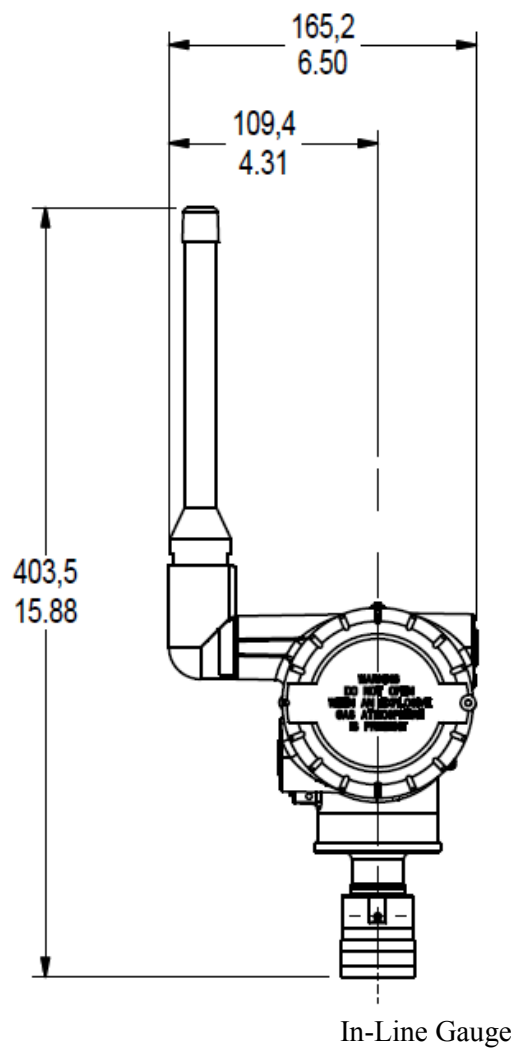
Typical mounting dimensions for STDW740, STDW770, STDW7(3,4,7,8,9)L (rear view)
